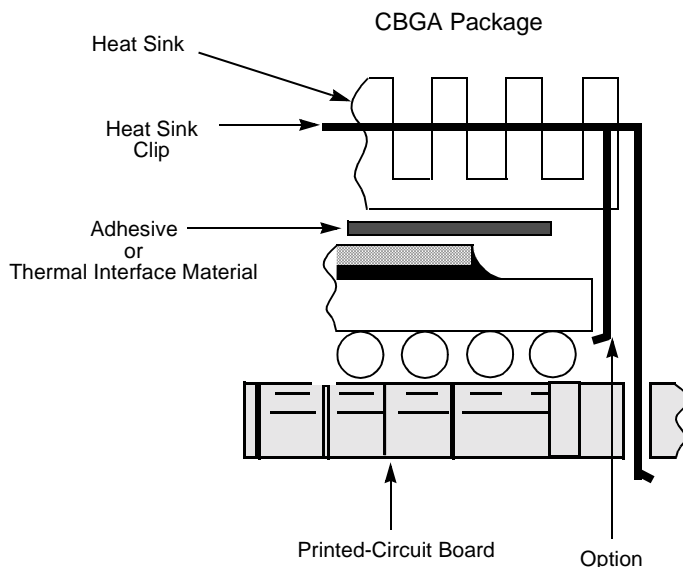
Package Exploded Cross-Sectional View with Several Heat Sink Options
